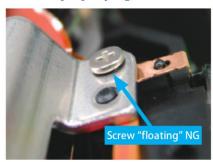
Auto Focus FPC Ass'y Assembly 6
